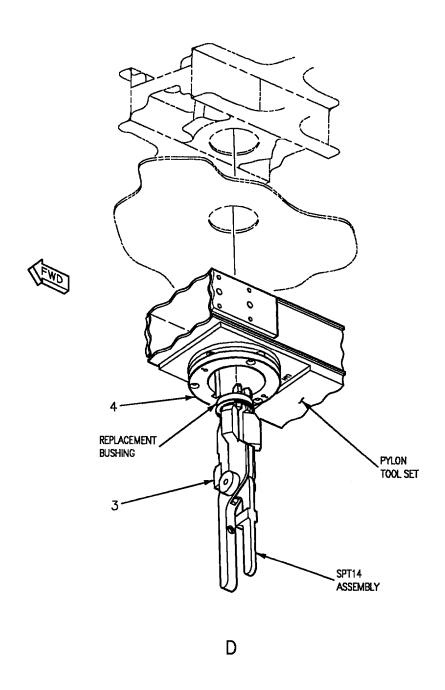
Boring Structure/Splice Fitting, Installation and Boring of Inboard Pylon Post Bushings (Sheet 2)
